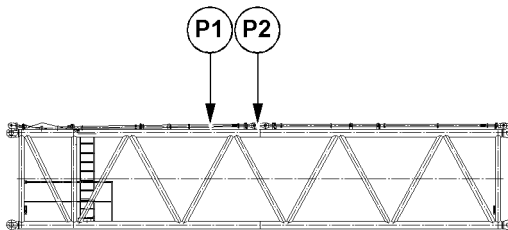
Fastening points S-intermediate sections 14 m , for flying assembly
